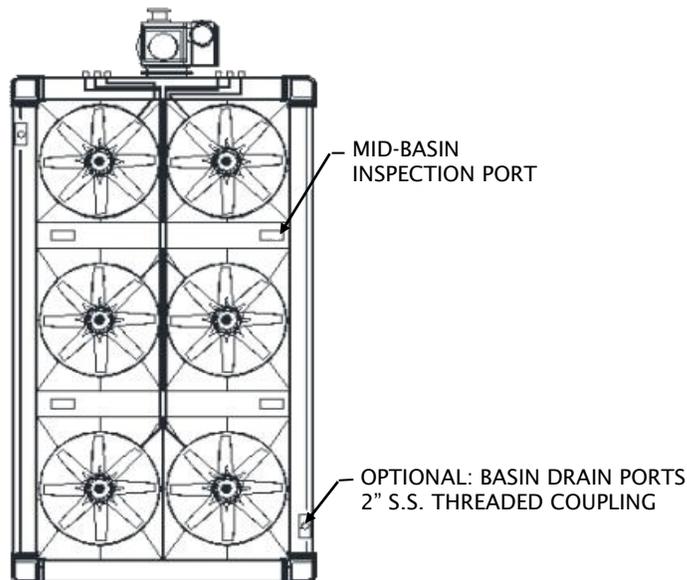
Mid-Basin Inspection Ports (6-fan tower module shown)
